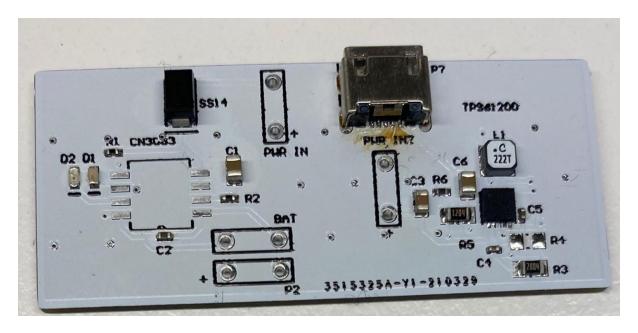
PCB soldering result of First Prototype with missing CN3083
